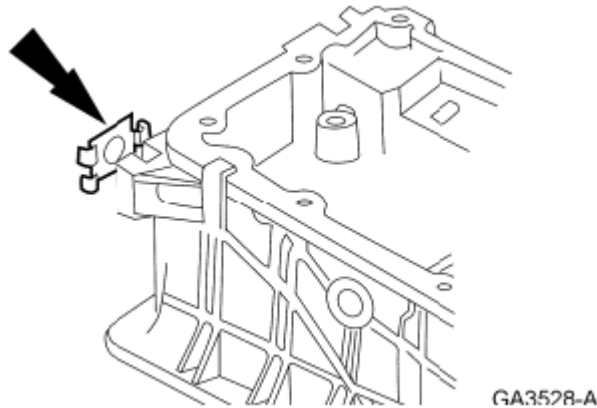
Installing Shims On One Or Both Sides Of Cylinder Block Cradle
